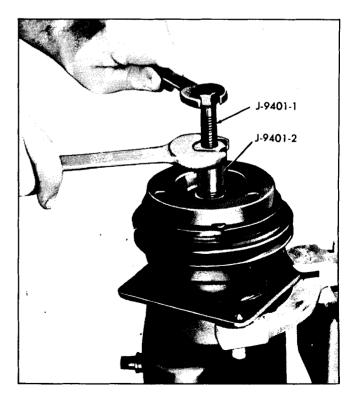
A-63 Removing Hub and Drive Plate Assembly
